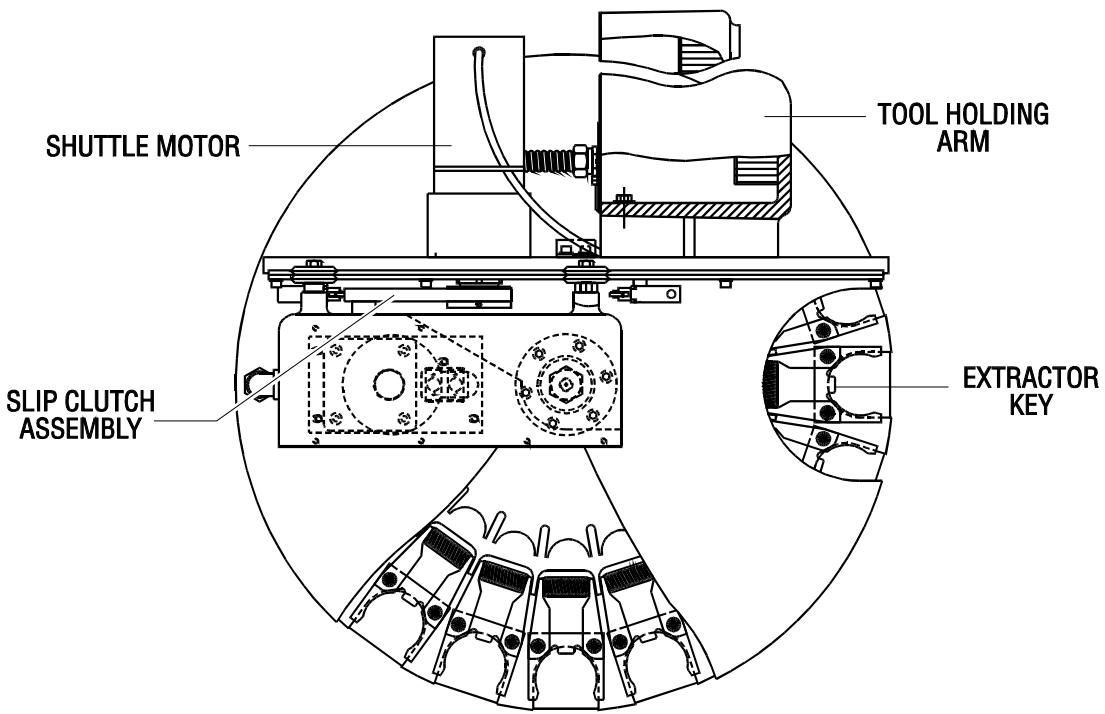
Automatic Tool Changer - Mechanical Assembly (Top View)
